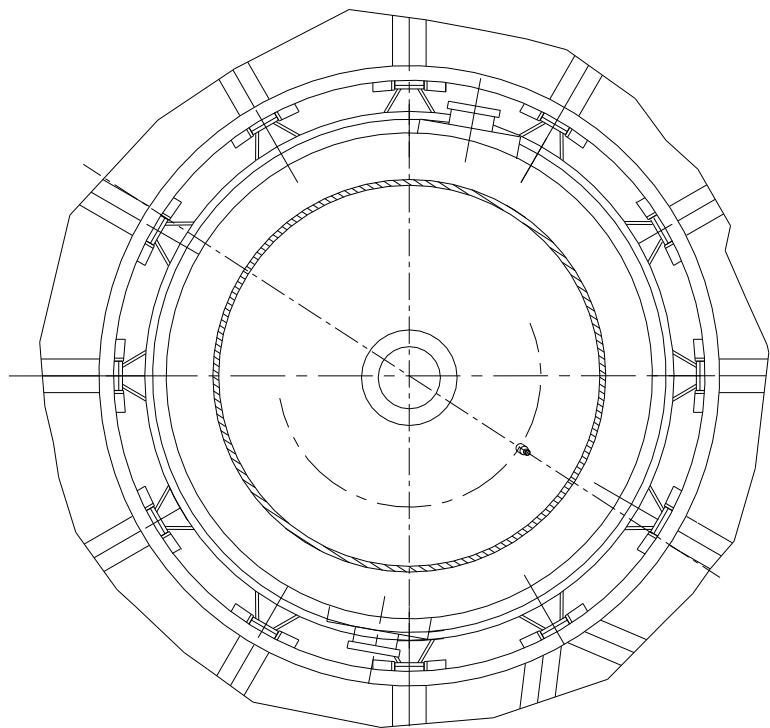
Drawing of components of the pressurizer upper supporting unit.
